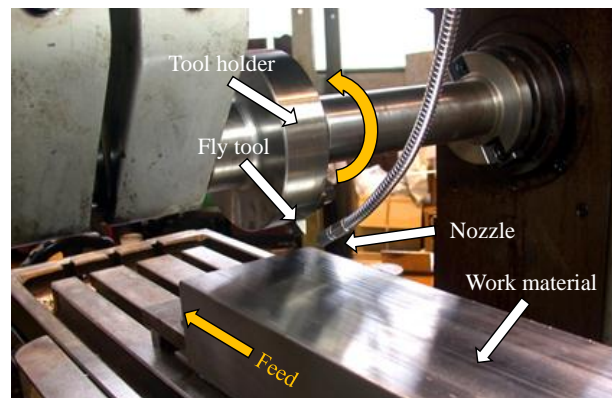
Setting condition of the fly tool and work material to simulate hobbing
